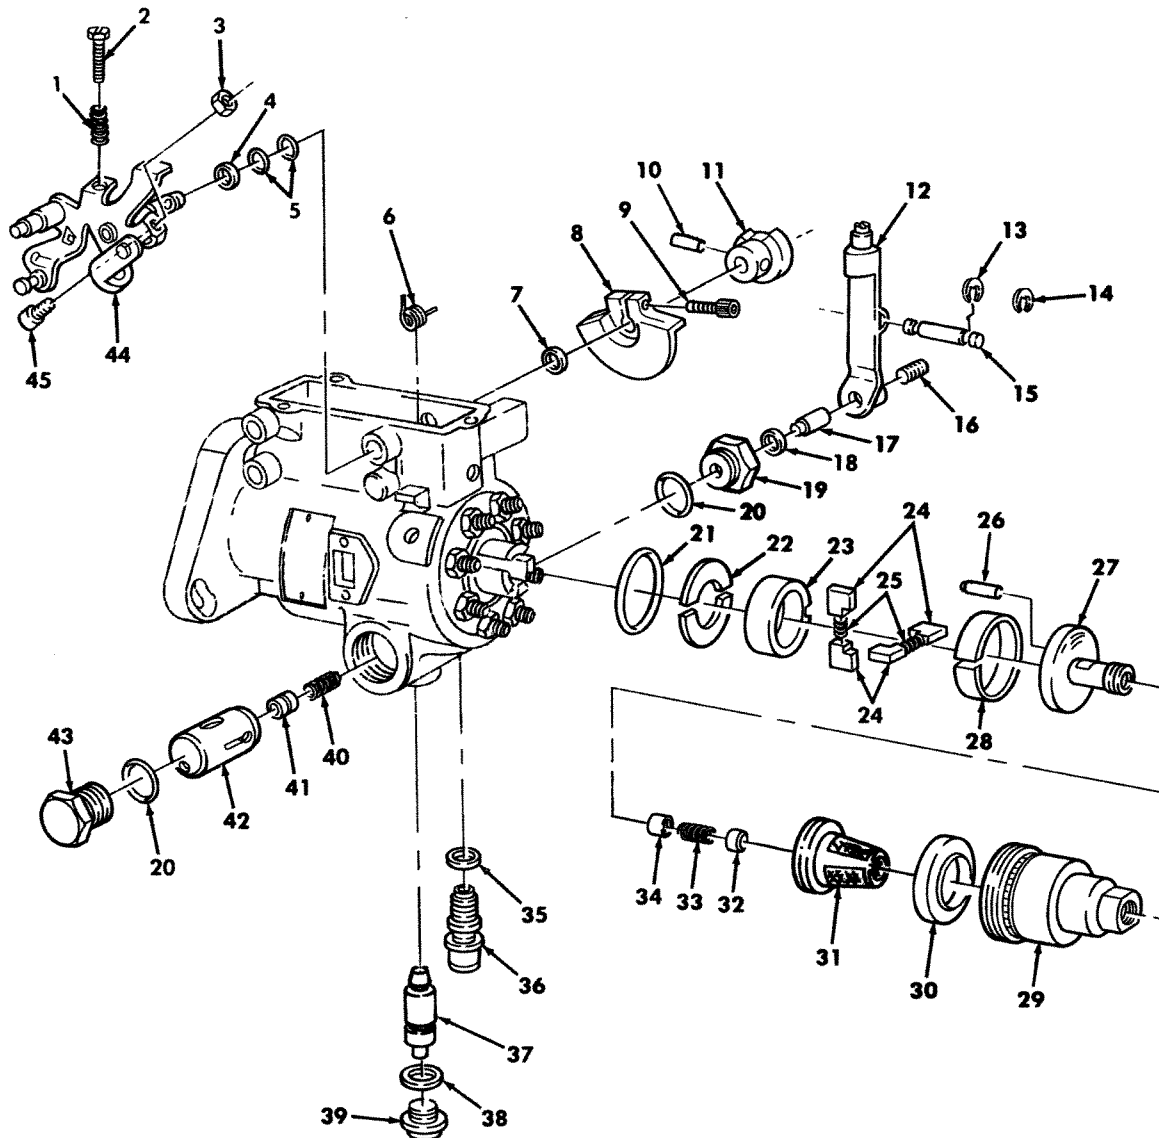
Fuel Injection Pump Throttle Shaft, Regulator, Transfer Pump, and Related Parts.
